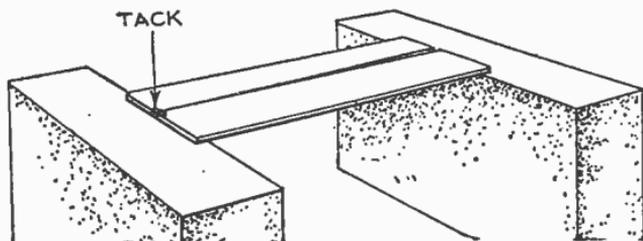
,148.—Plates tacked for welding. *Instructions:* Tack the left end of the plates together. This is done by holding the flame close to the joint until the steel melts and runs together. Remove the flame instantly when the metal flows, as otherwise a hole will be burned through. Warm the two plates by passing the flame over them lengthwise two or three times.
